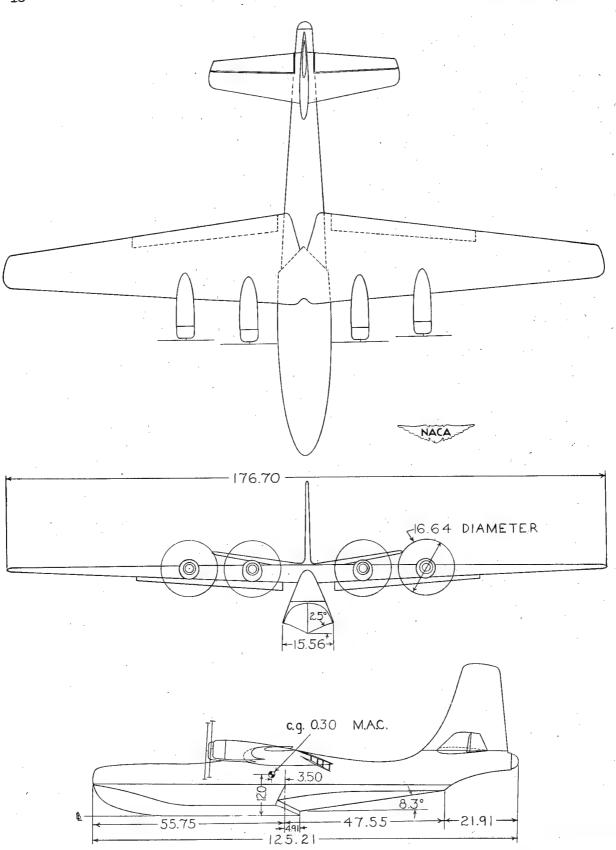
General arrangement of Langley tank model 206. (All dimensions are in inches.)
